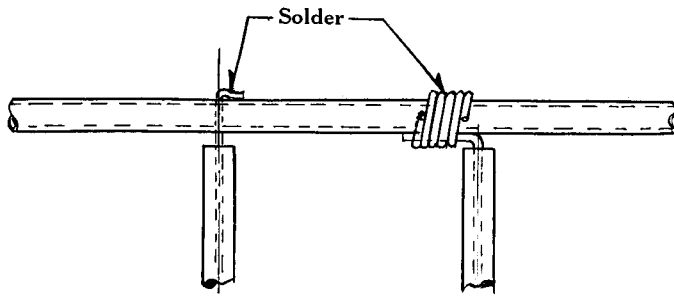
Method of Tapping Small Wires to Tube Bus.
